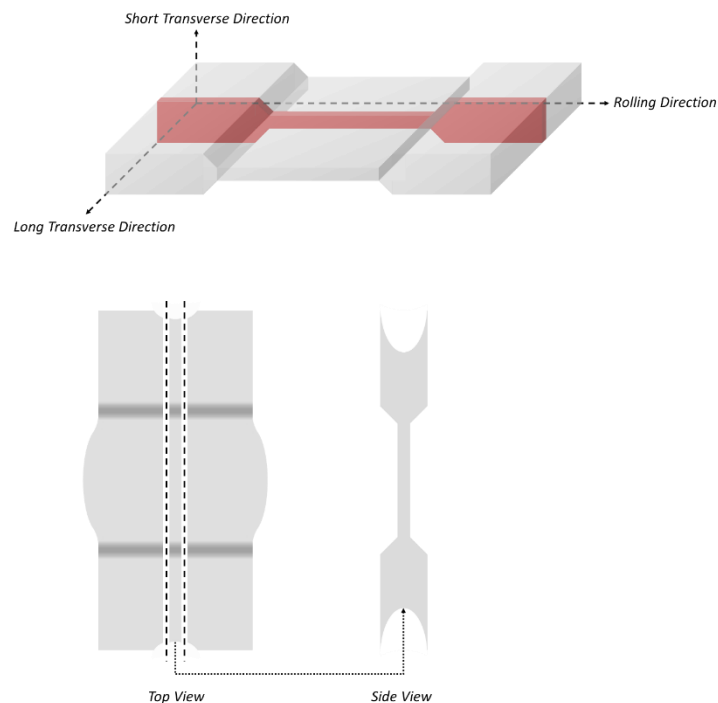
Schematic view of the PSC test piece clarifying the location of the tensile test piece sectioned for tensile testing, in the middle of the test piece perpendicular to the rolling direction.
